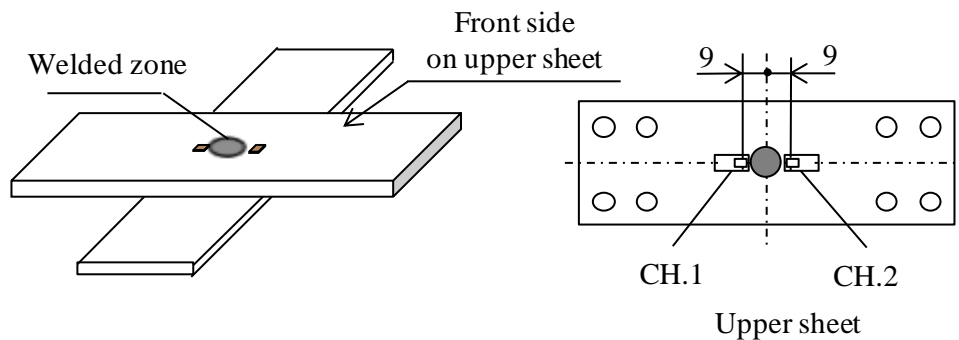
Two strain gage locations on upper sheet of FSSW specimen.
